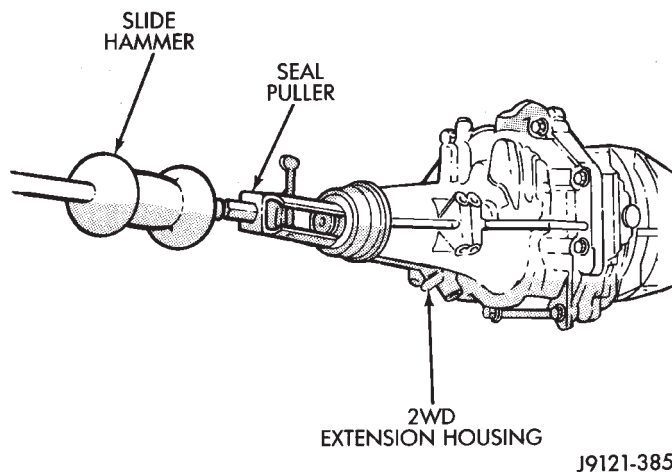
Removing 2-Wheel Drive Extension Housing Seal
